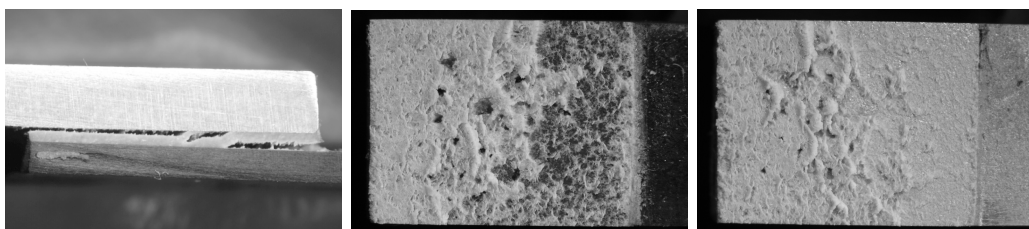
Side view of the broken CFRP-aluminium SLJ specimen (left) and fracture surfaces (middle and right).
